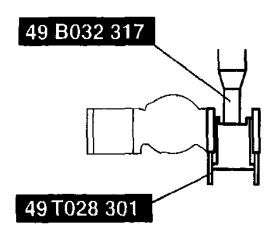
Aligning Notches Of Mounting Rubber Courtesy of MAZDA MOTORS CORP.
